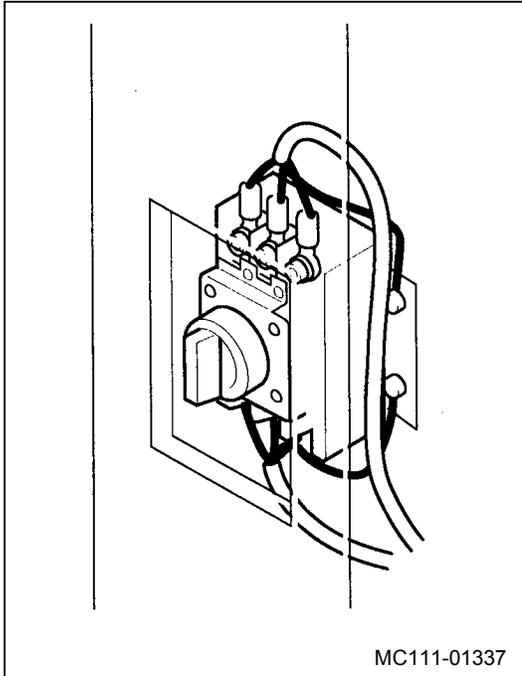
Connecting the Power Supply Cable (2/2)
